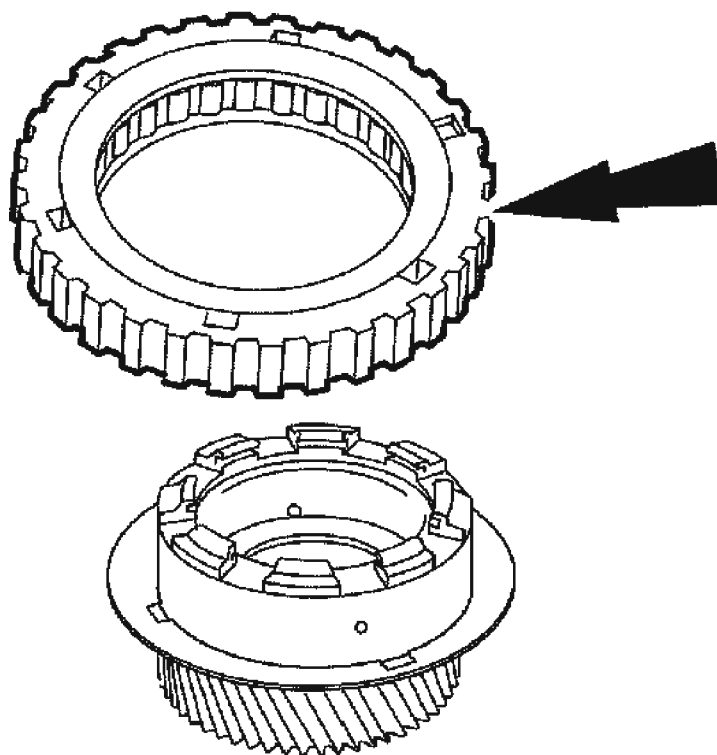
Installing Forward One-Way Clutch End Caps Onto Sprag Assembly
